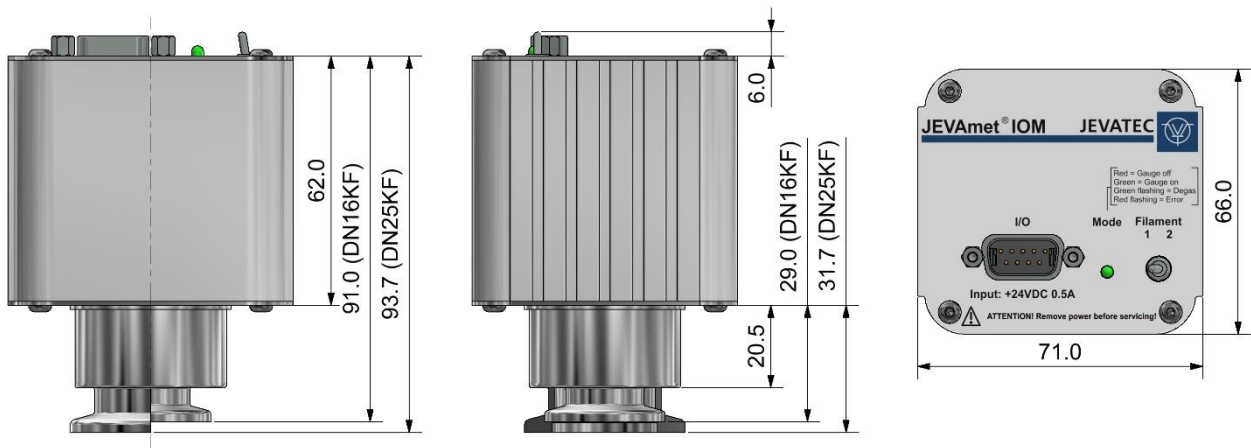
Dimensions JEVAmets® IOM (in mm)
